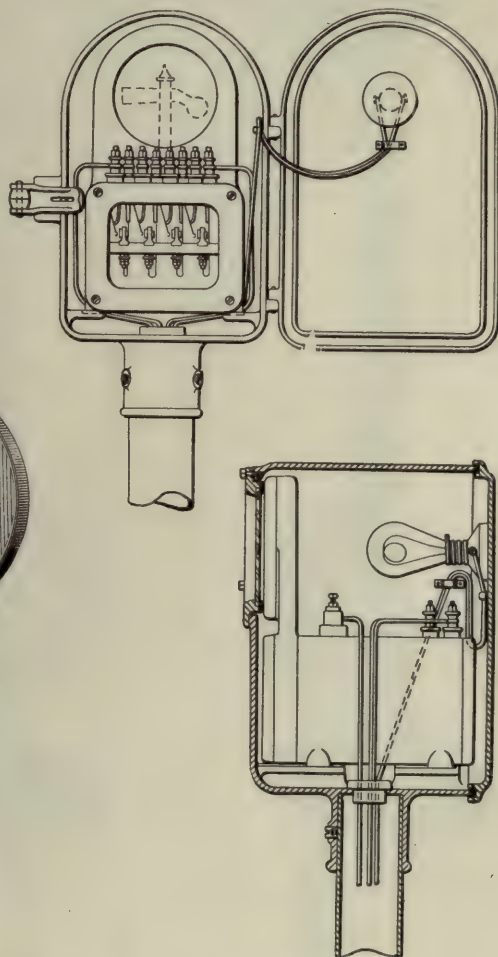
Semaphore Switch Indicator Mounted on Iron Pipe Post Set on Cast Iron Base, Embedded in Concrete Foundation.
